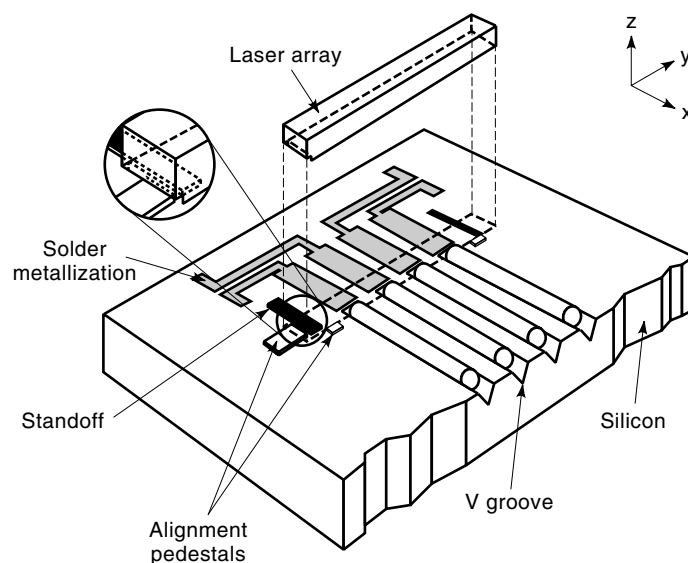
A four-channel laser array mounted on a V-grooved Si waferboard using the passive alignment concept.
